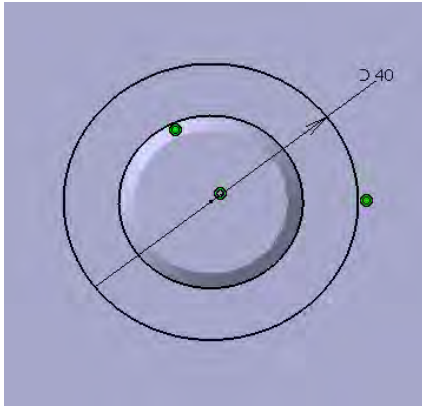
Sketch of Pad feature for creating Guide Bush
